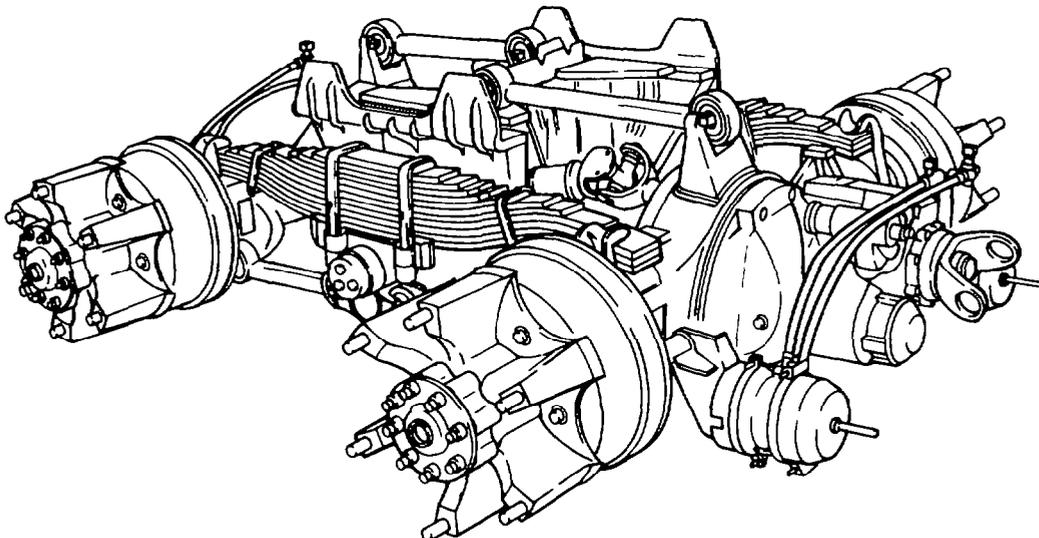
Tandem Rear Axle (Bogie) Assembly
